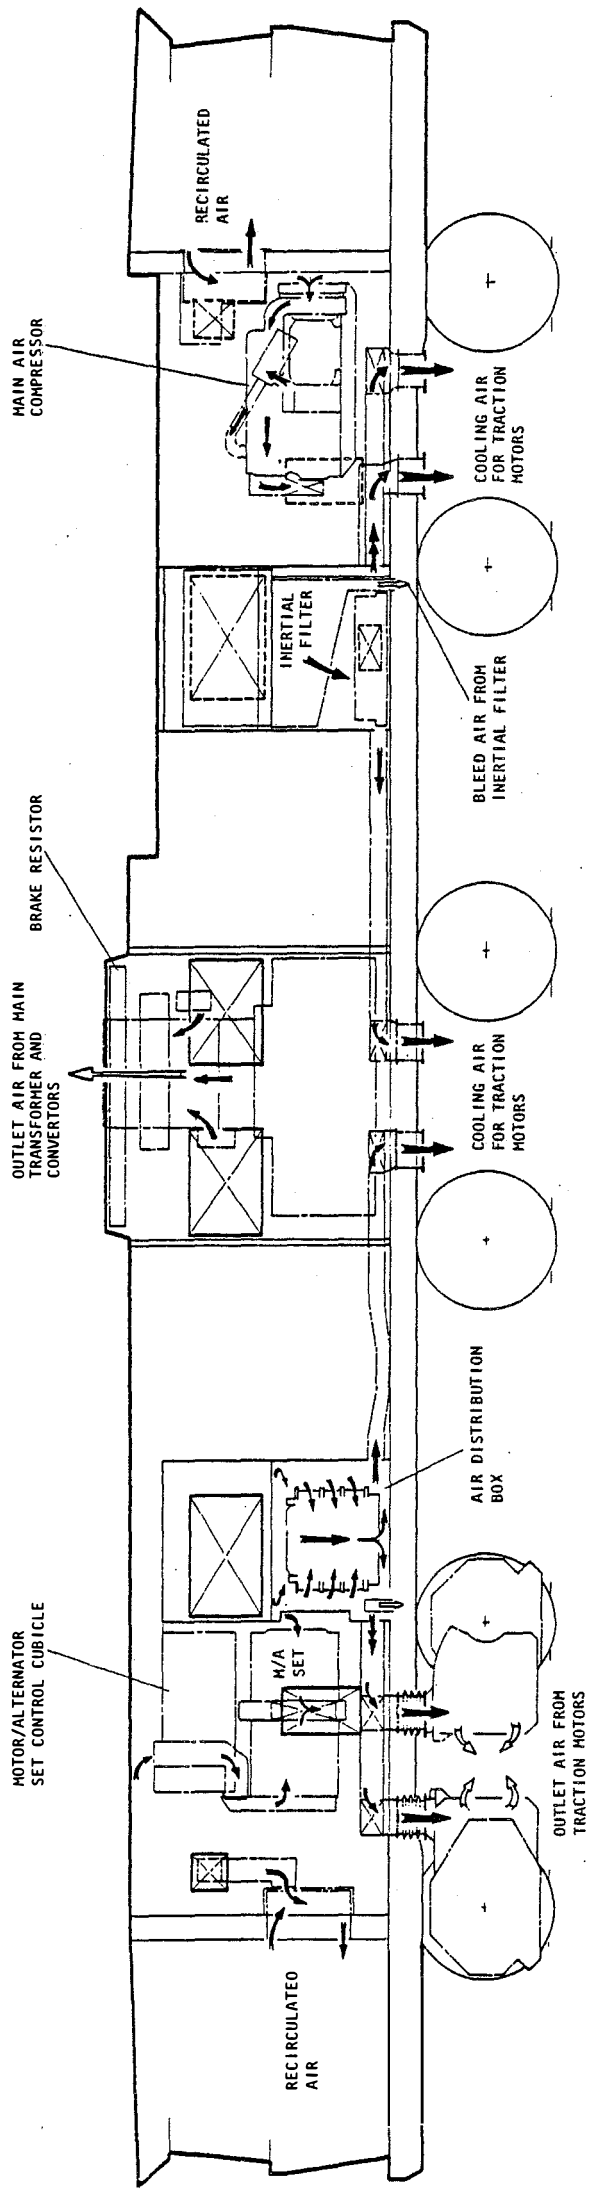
ARRANGEMENT OF EQUIPMENT-SECTIONAL VIEWS
